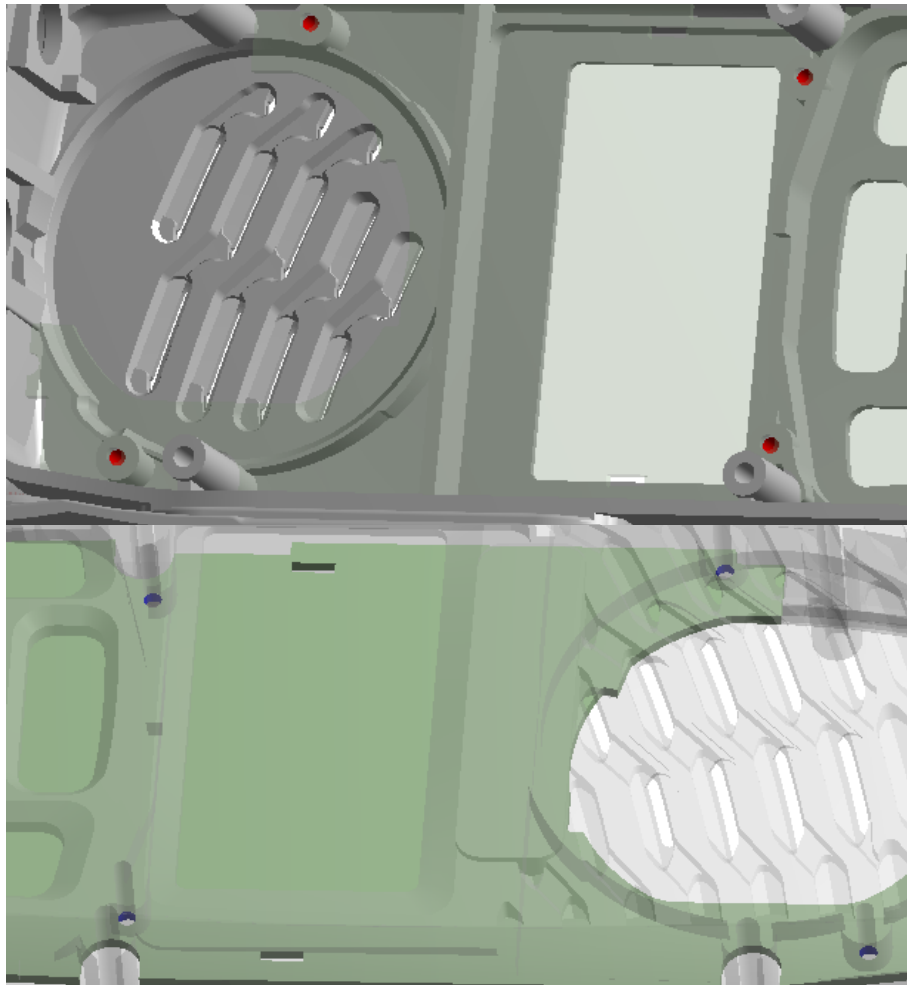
Face - face screw connection between front panel (red) and MMI board (blue)
